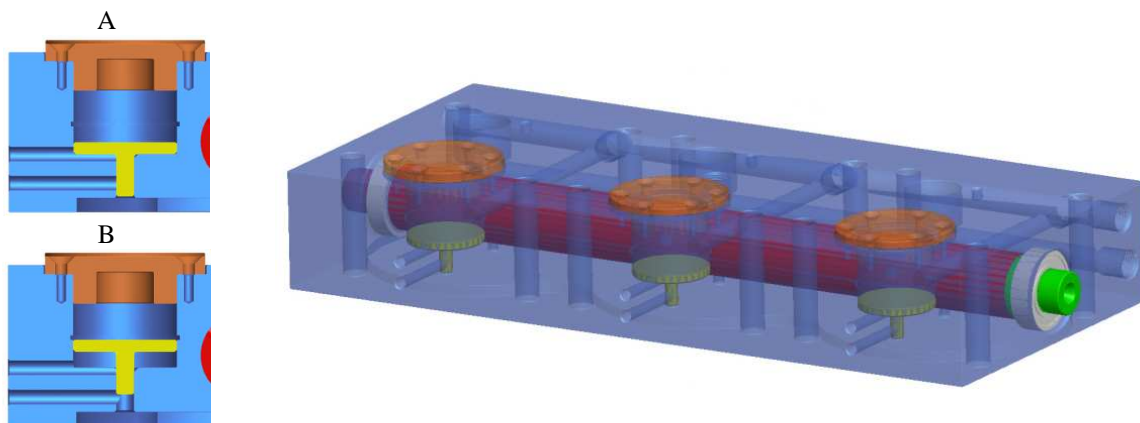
Over-pressurisation valve and cylinder head cut-away
